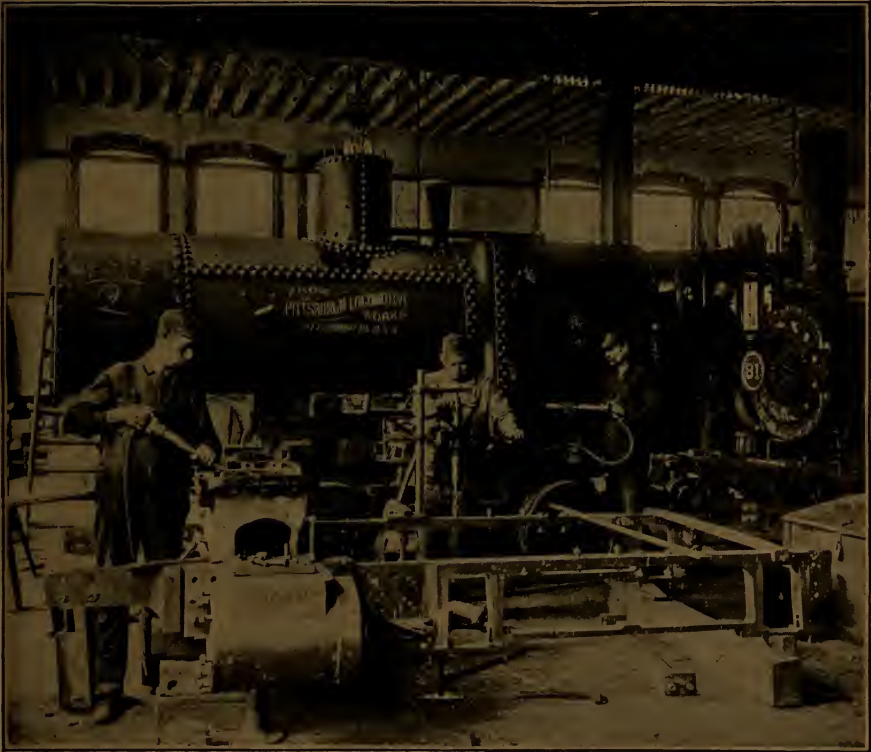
CHIPPING AND DRILLING WITH HAESLER DRILLS AND BOYER TOOLS.
